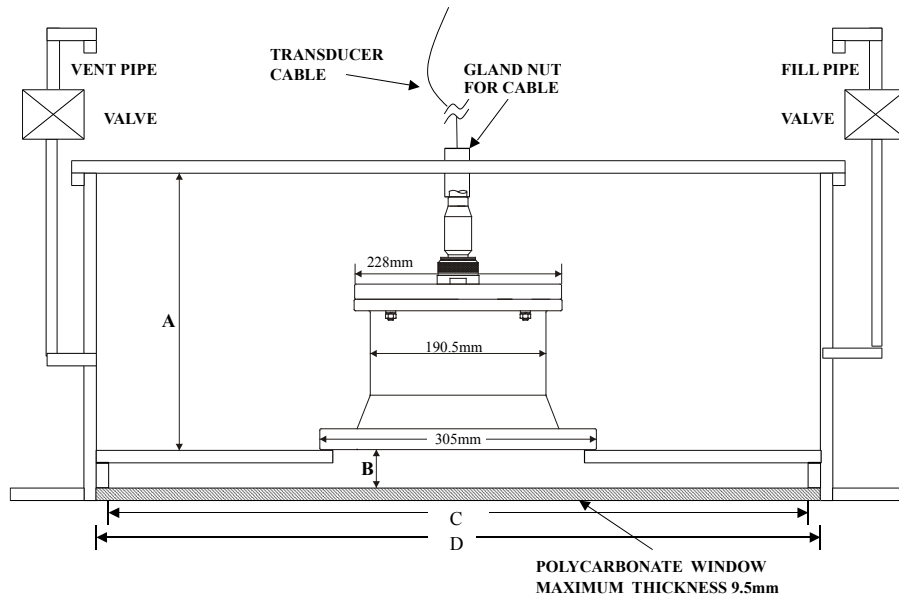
Inside Vessel Mounting - OS 150 kHz Flanged Transducer
